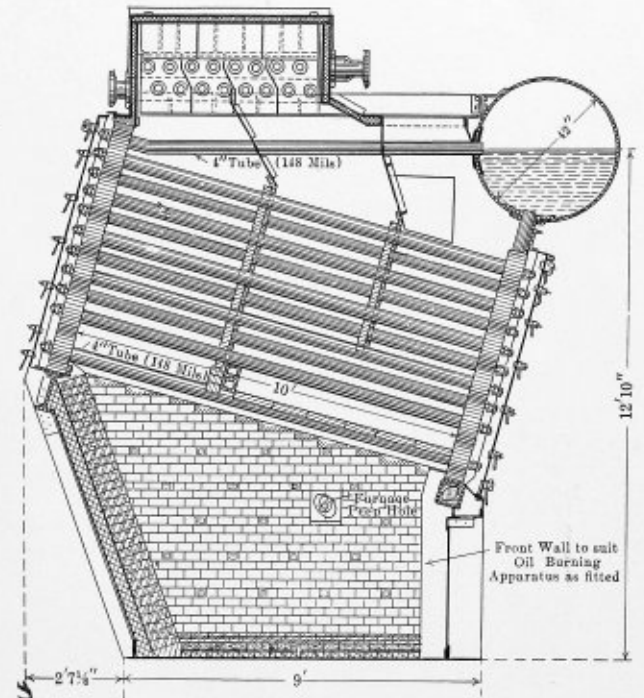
Section of Babcock & Wilcox Marine Type Boiler
